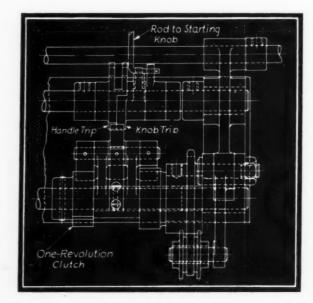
Plan of clutch mechanism showing separate operating trips in stop position
